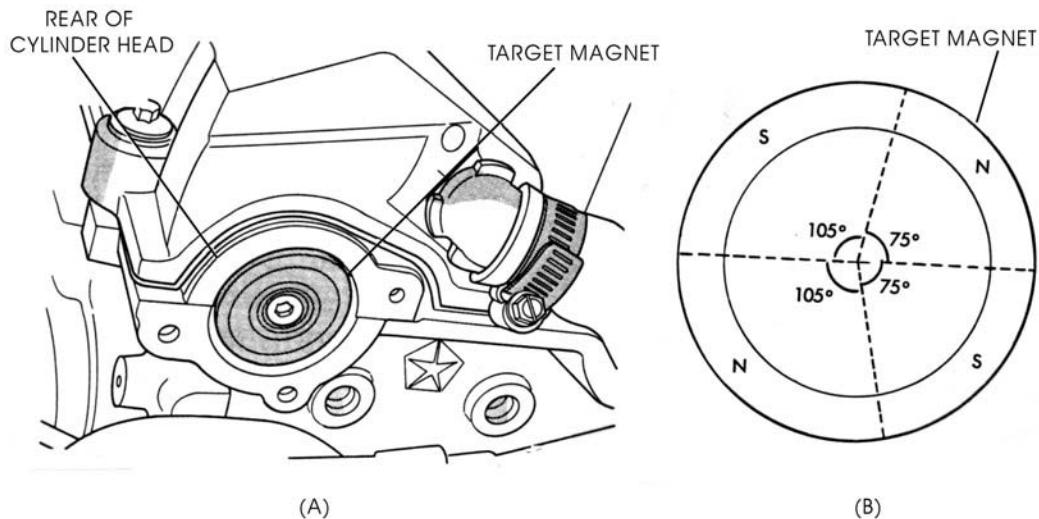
The camshaft position sensor in this system is triggered by a target magnet (Figure 75A). The target magnet is a magnetic disc that contains four different poles (Figure 75B). (Courtesy of Chrysler Corporation)
